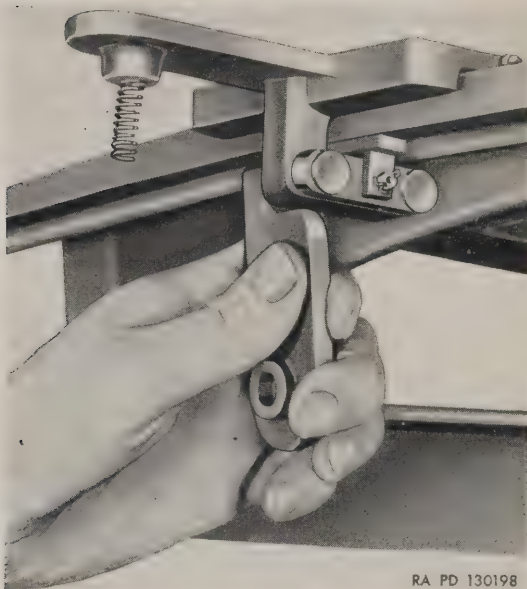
Seating the clamping shoe assembly—sound-ranging plotting board M1 or M1A1.
